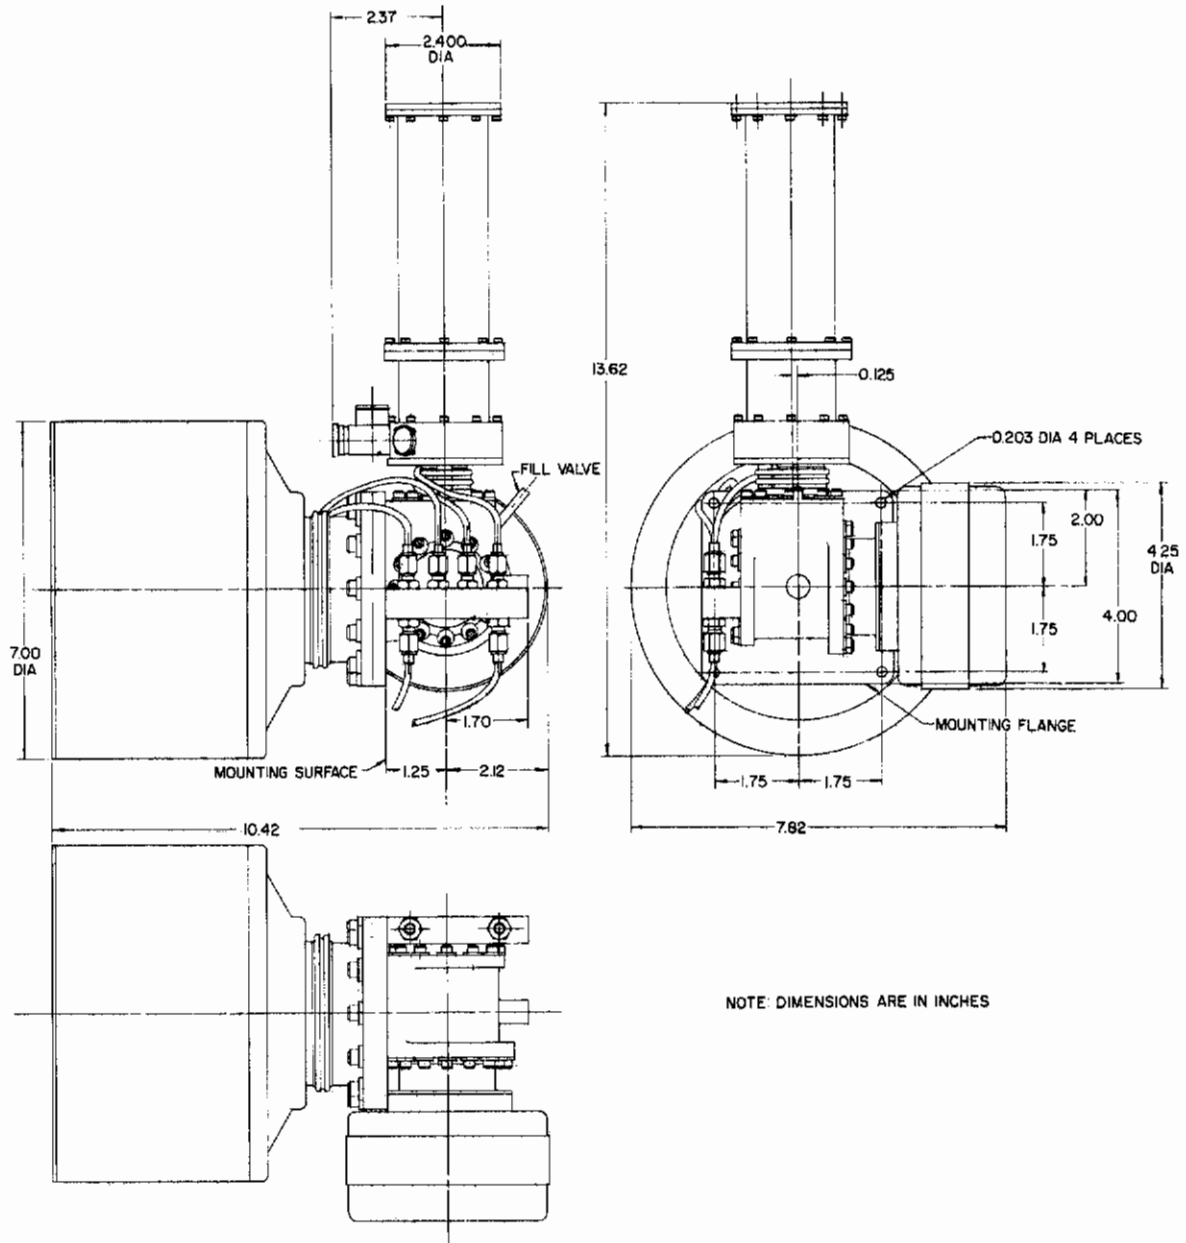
Outline and mounting drawing of 30°/75°K VM refrigerator
